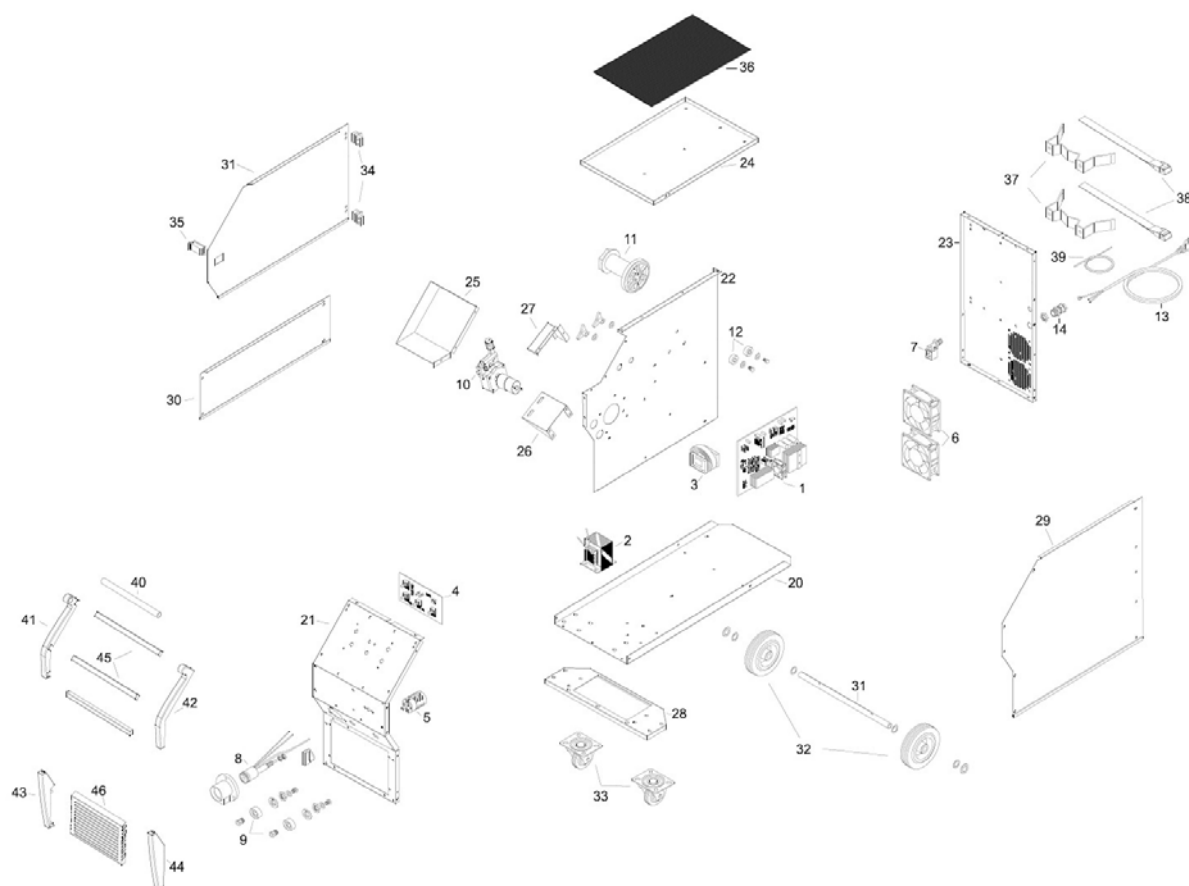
Spare parts drawing EASY-MIG 211i MULTI
